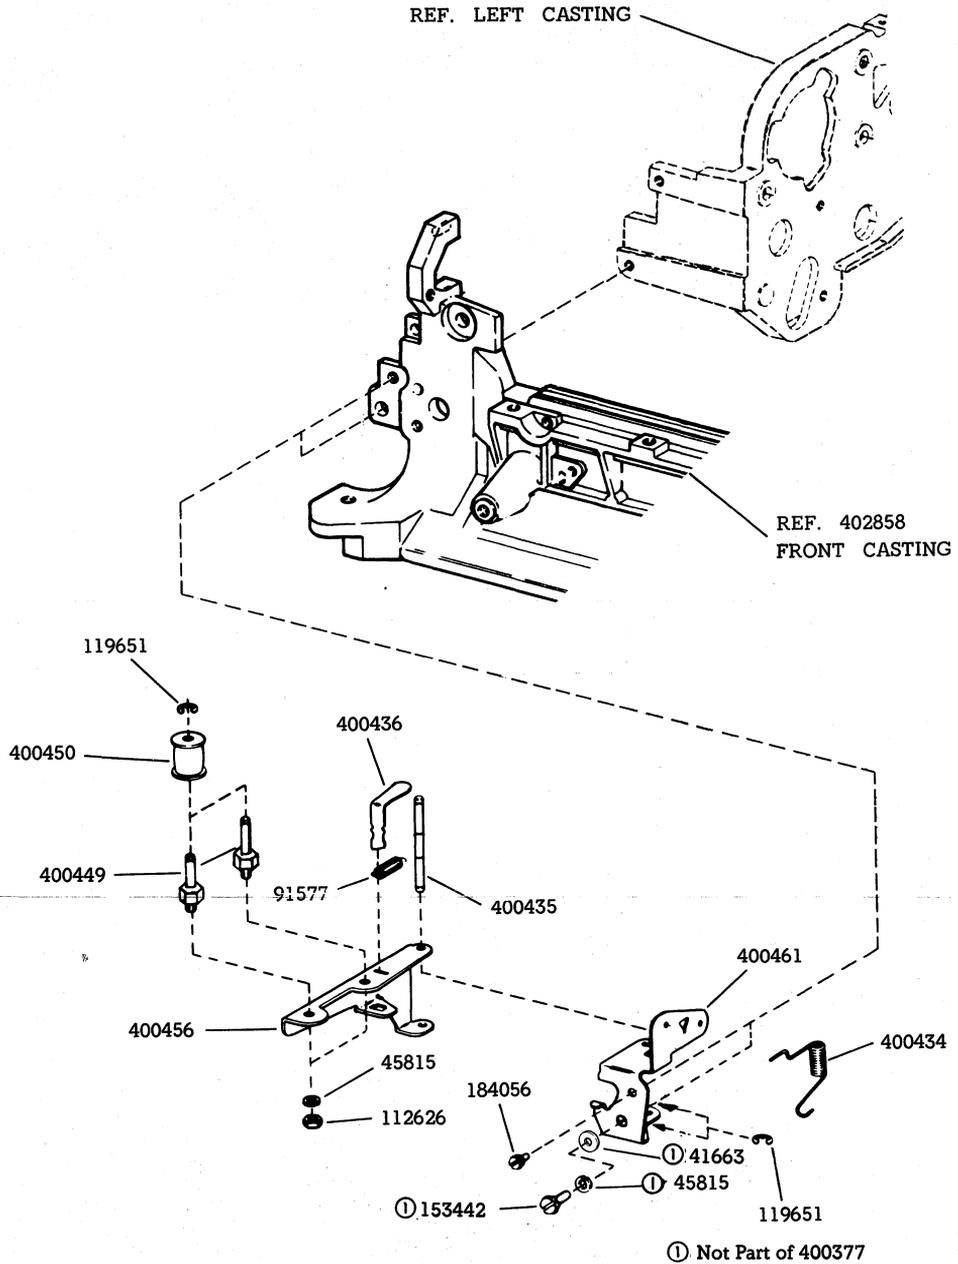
Front Casting Assembly (Friction Feed 40P101
